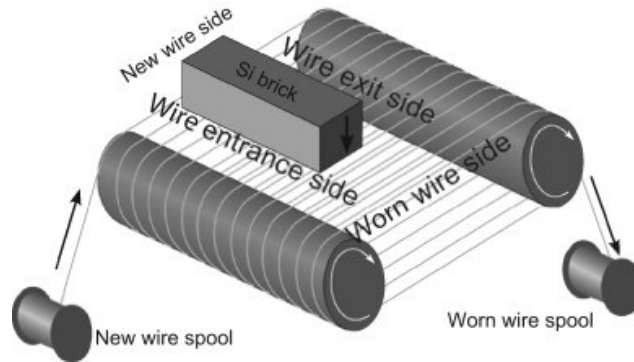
Slicing of a silicon brick using fixed abrasive diamond wire sawing [8].
